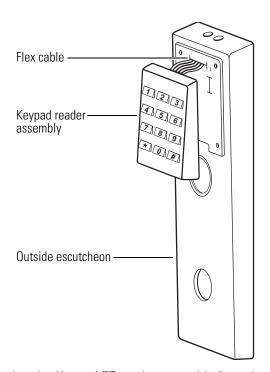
Removing the Keypad EZ reader assembly from the outside escutcheon
